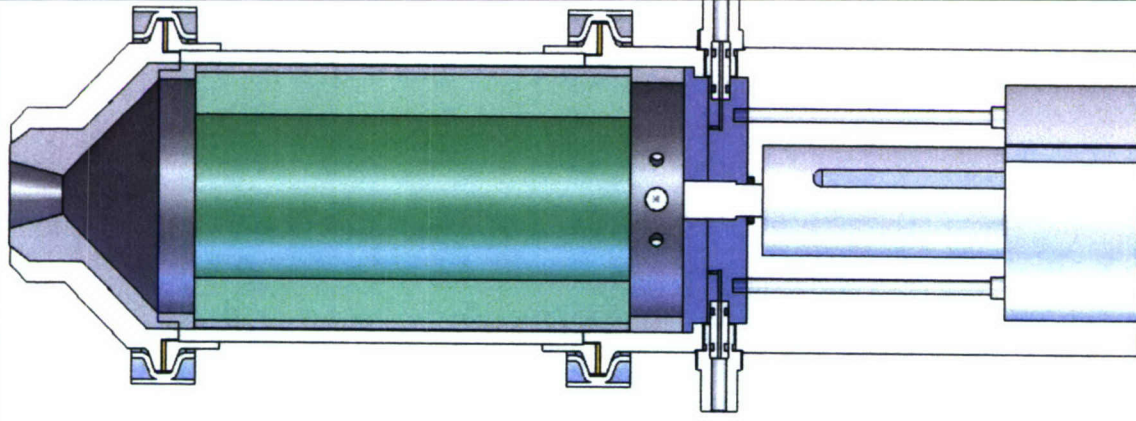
Design rendering for our hybrid rocket motor with a conical nozzle and a single hollow cylindrical fuel grain.
